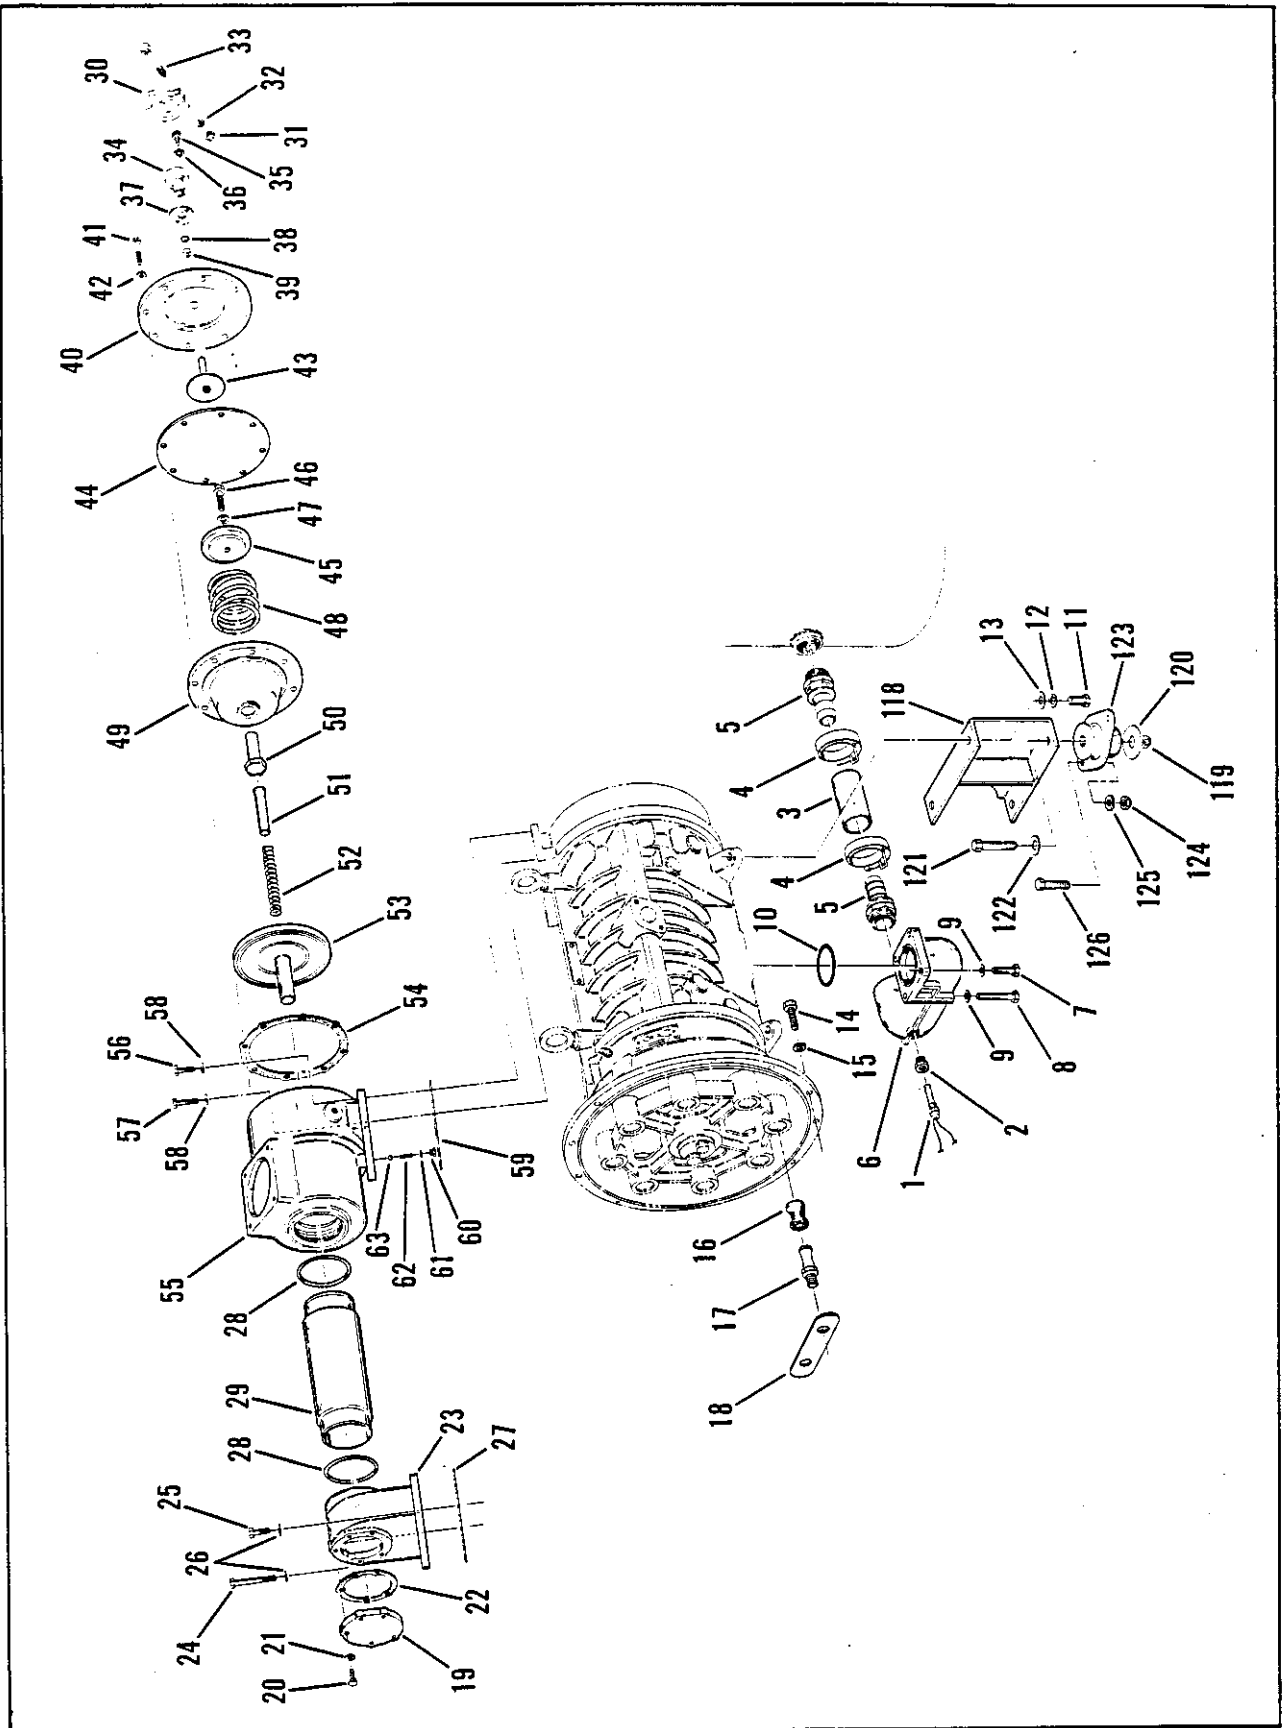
Air compressor assembly and mounting group (sheet 1 of 2)
